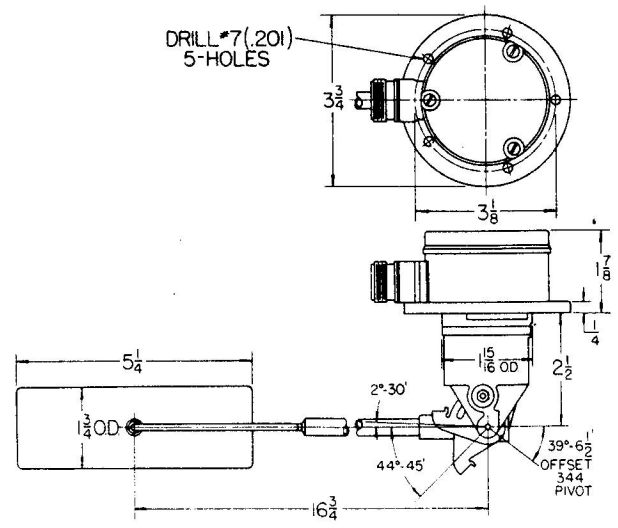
(Sheet 1 of 4 Sheets). General Dimensions
